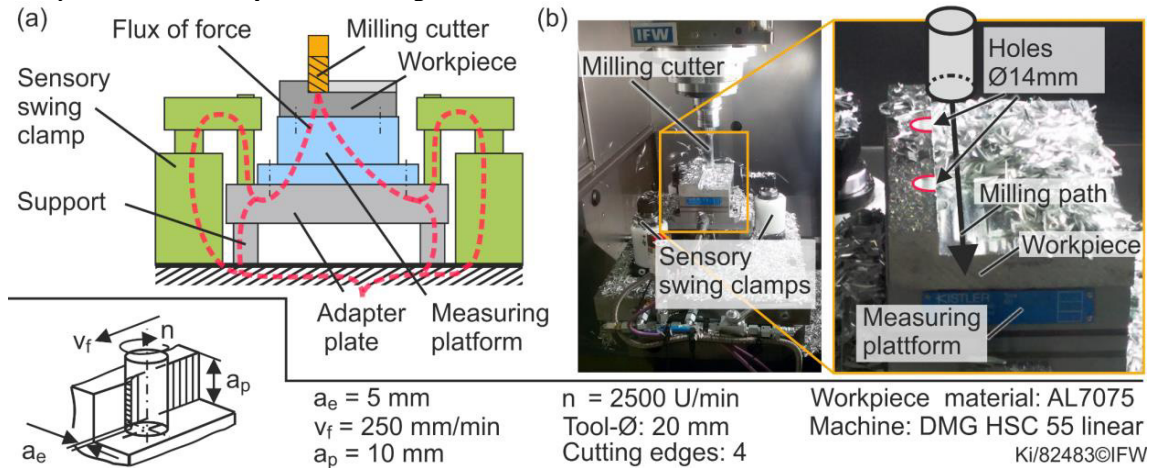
Set-up for milling tests: (a) Schematic drawing; (b) Experimental set-up
